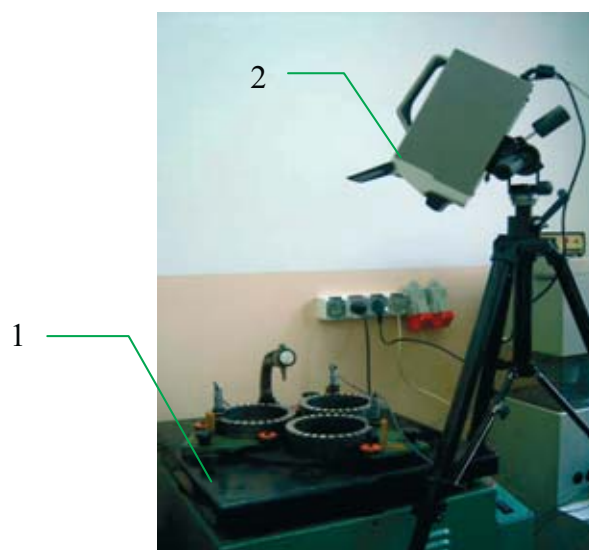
Measurement equipment: 1-lapping machine, 2-infrared camera
